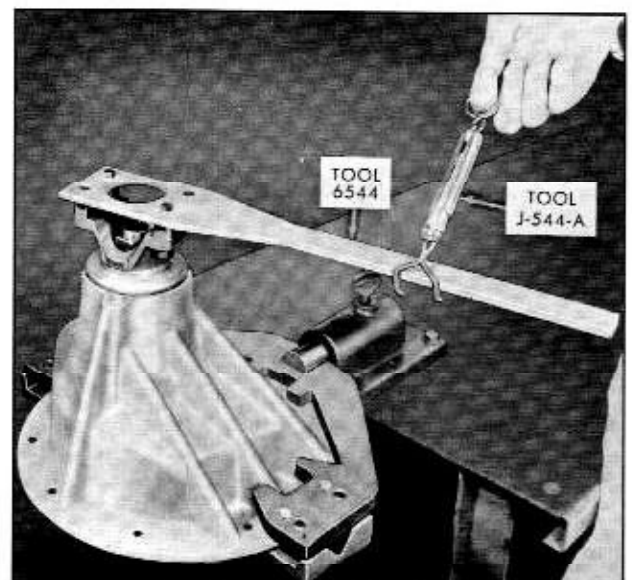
Measuring Bearing Preload With Spring Scale
